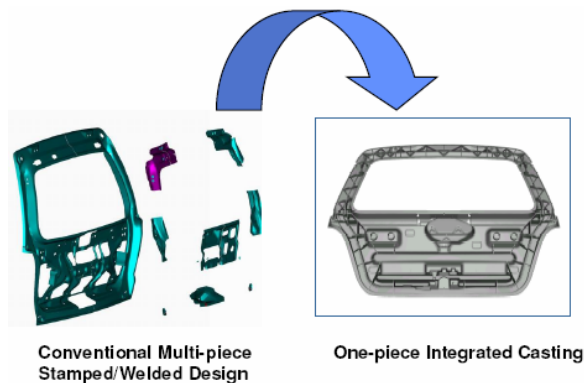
Single casting integrated from a multi-piece stamped steel liftgate inner structure.
